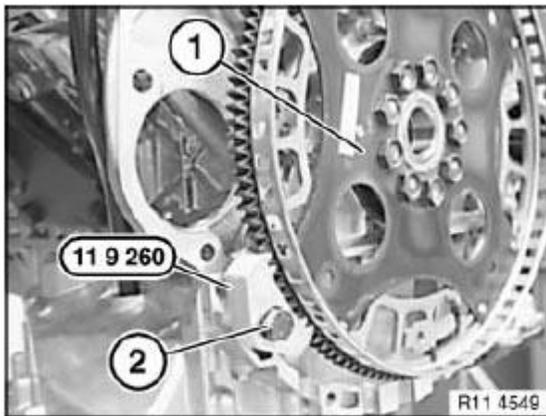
Supporting Flywheel With Existing Transmission Bolt And Special Tool 11 9 260
